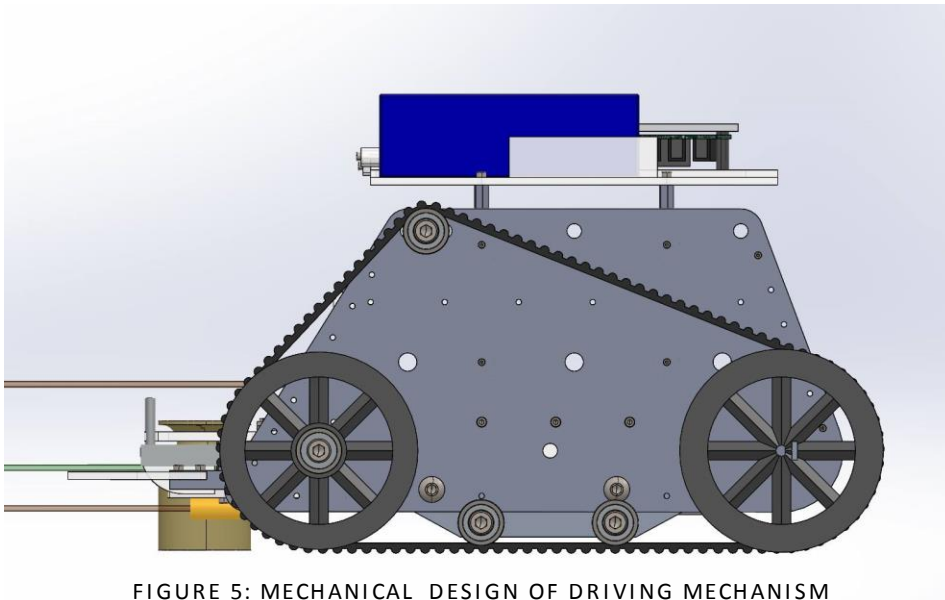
MECHANICAL DESIGN OF DRIVING MECHANISM
